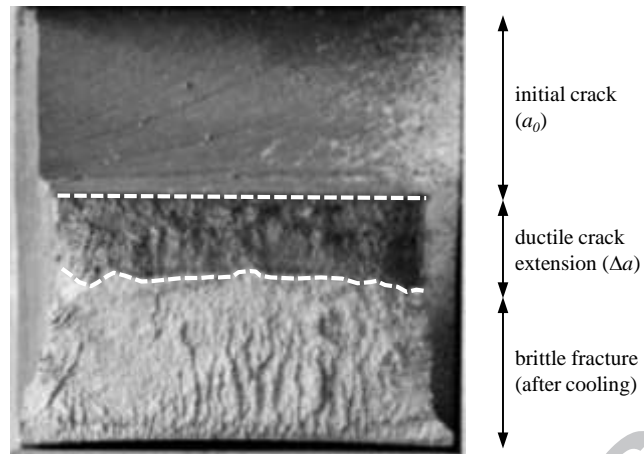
Example fracture surface after heat tinting for specimen WM-03
